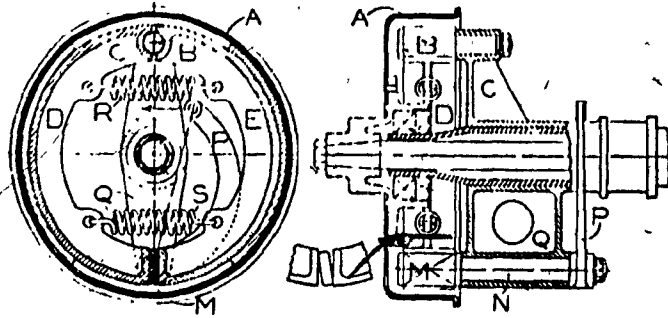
Shoe Brake Type (Ref. 1)
